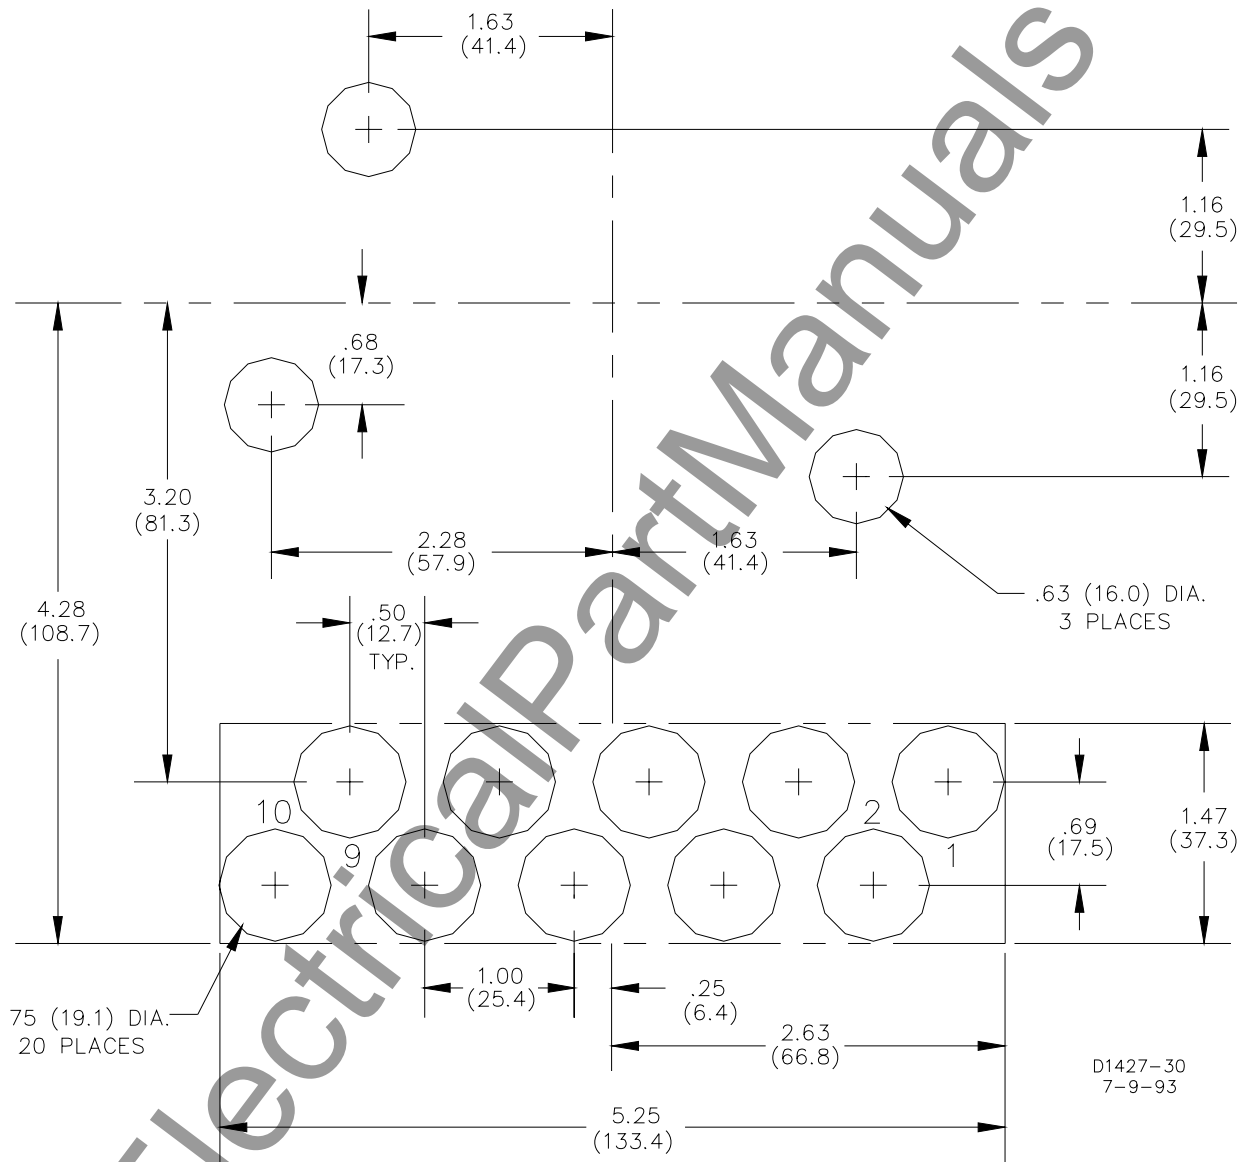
Panel Cutting/Drilling, Single-Ended Projection-Mount Case
